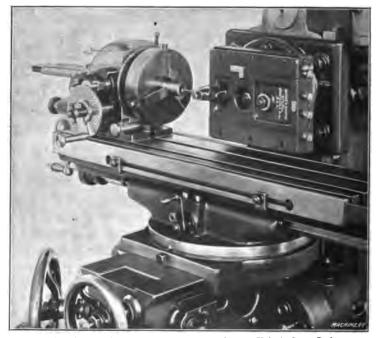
Slotting Attachment finishing Square Hole in Long Rod held in Spiral Head
